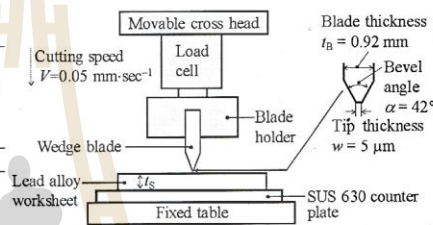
Experimental set-up for cutting and wedge blade geometry.
